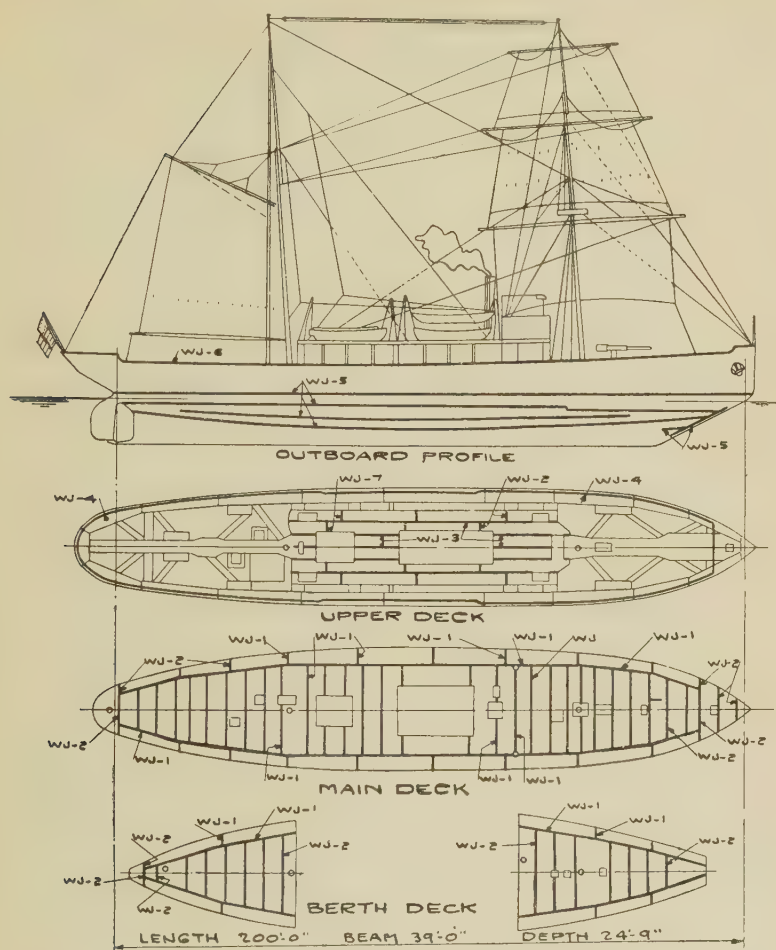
Welding of shell and decks of Coast Guard cutter *Northland*.
